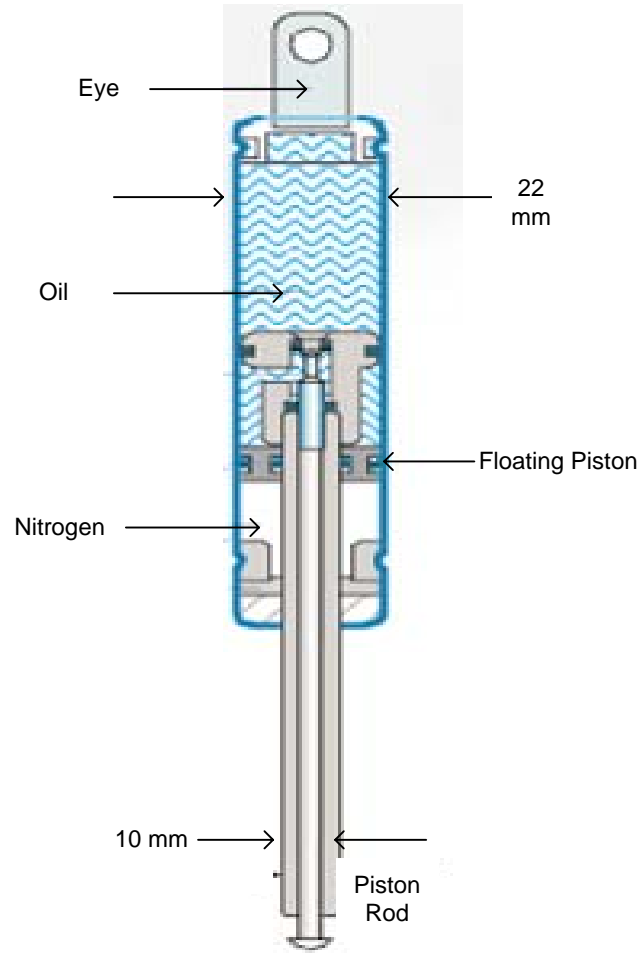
Rigid Blocking in Compression Gas Spring (See References Section)
